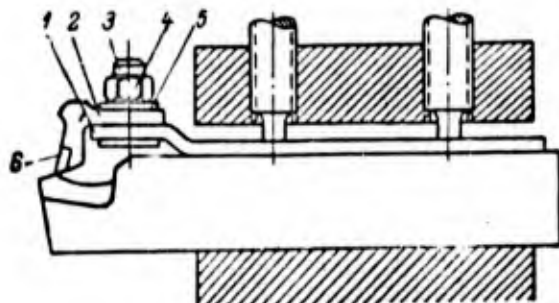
Chip Breaker Designed by the Leningrad Metal Works
